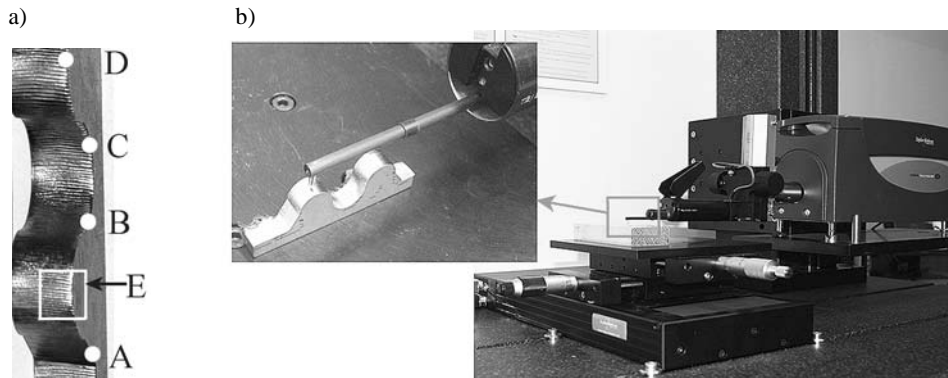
Research setup of contour and surface topography measurements: a) view of machined workpiece with marked places of measurements, b) profilometer during measurements
